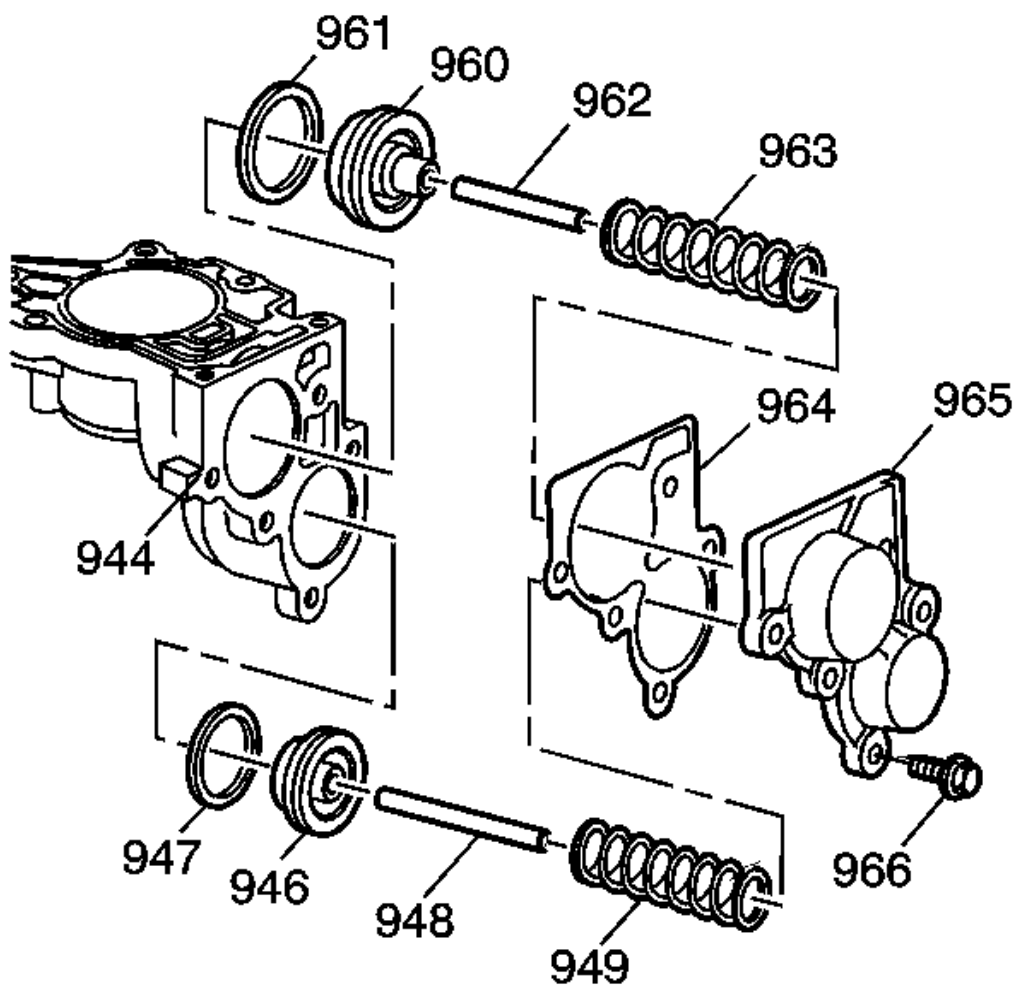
View Of Forward Accumulator Assembly & Reverse Accumulator Assembly
